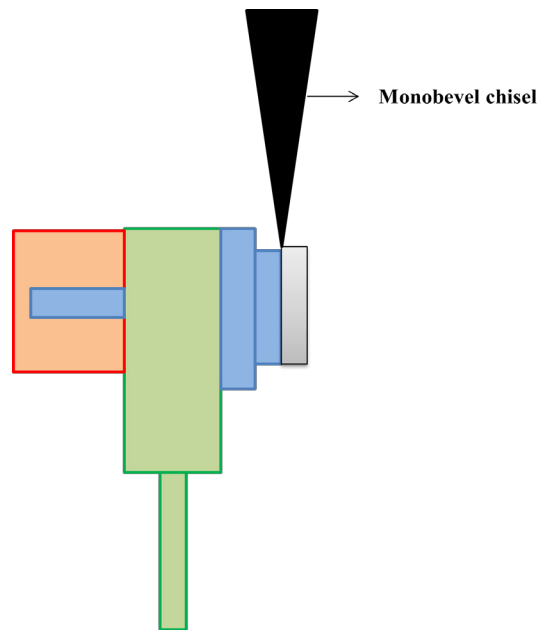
4 MOUNTING OF SAMPLE IN SHEAR TESTING JIG
